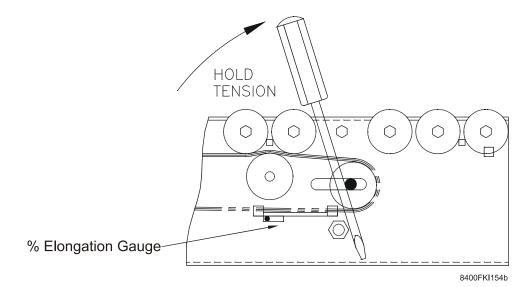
Carrier Roller Flat Belt Drive Adjustment
